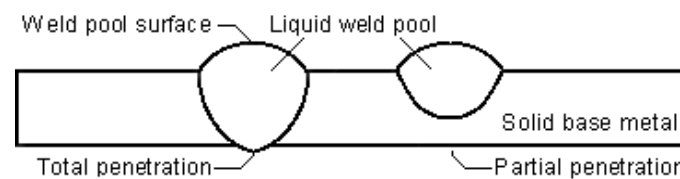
Weld pool and penetration: (a) partial penetration; (b) total penetration.
